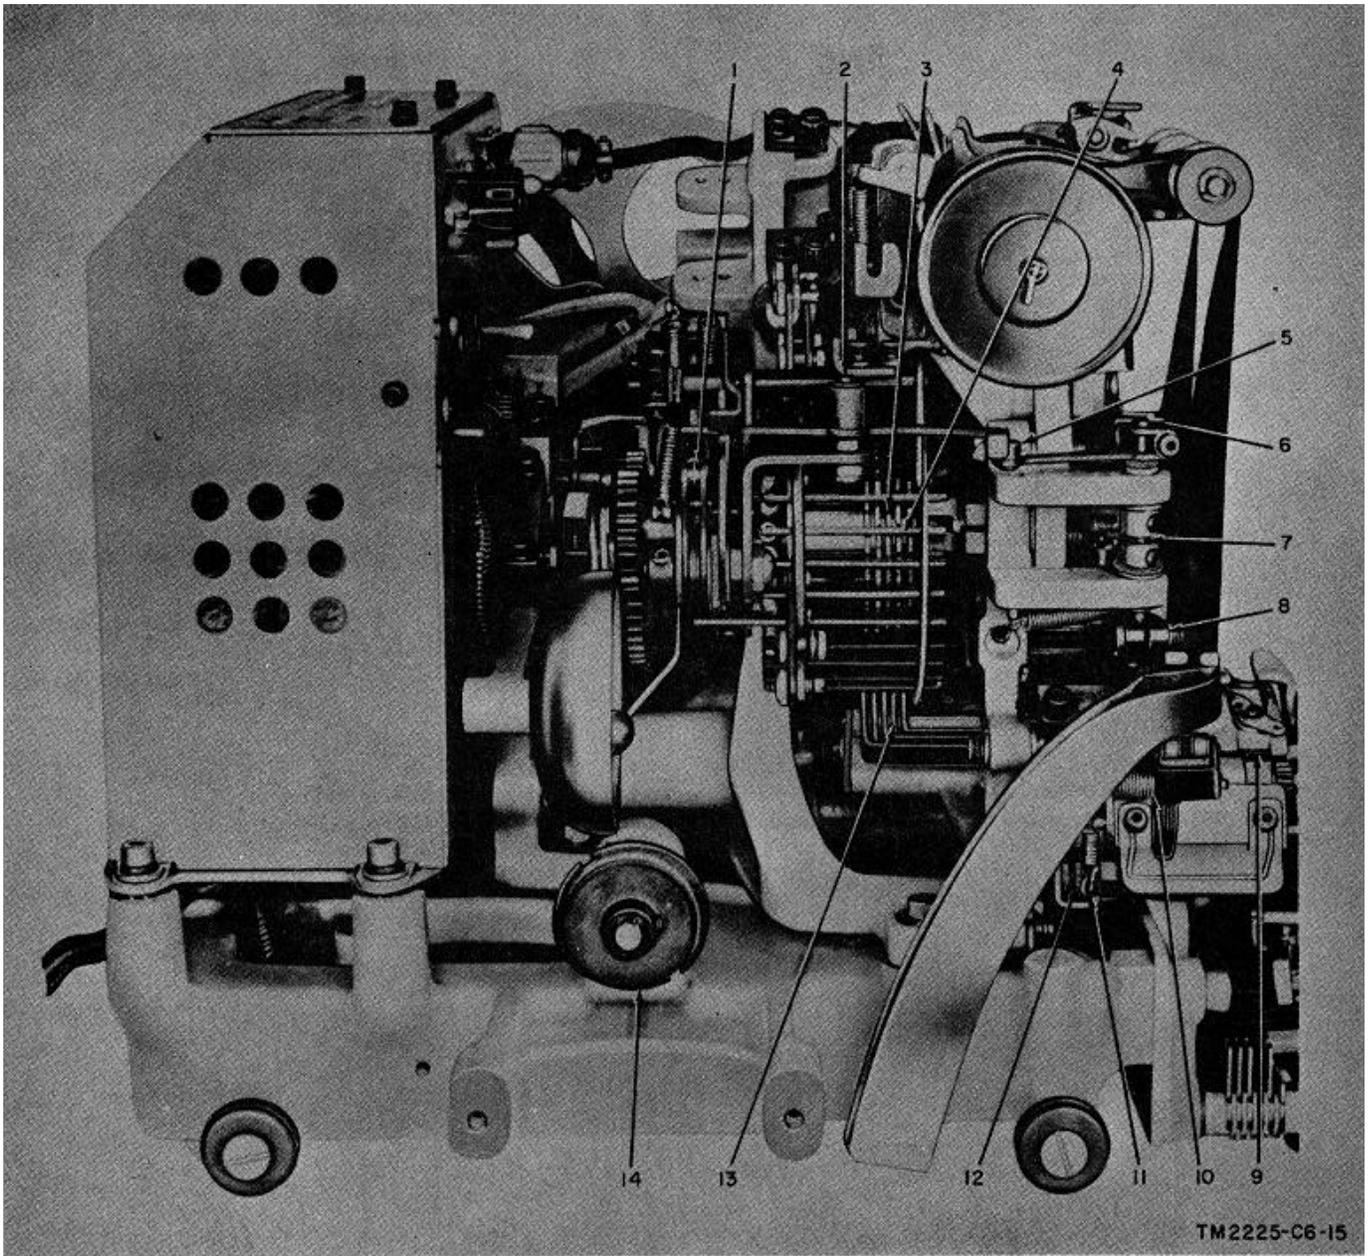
Keyboard-transmitter mechanism, showing lubrication points.
